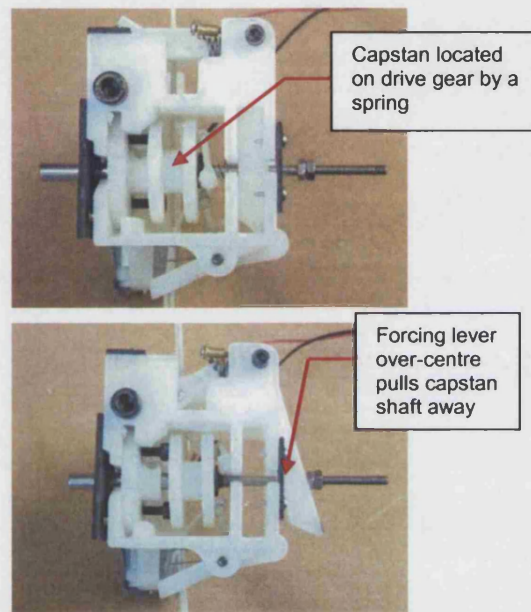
Side view of control box showing how the hinged lever pulls the capstan away from its drive gear.
